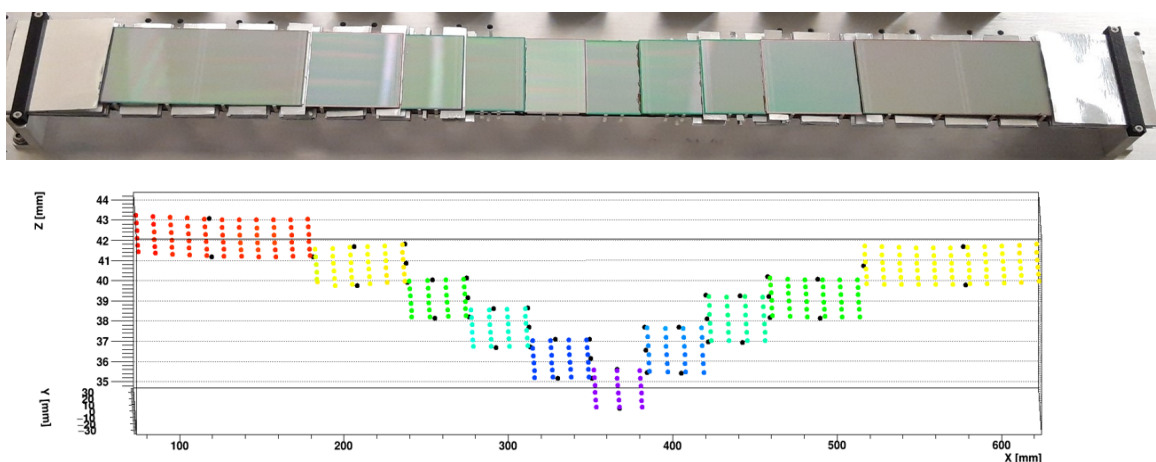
(Top) STS ladder assembled with 10 non-functional modules i.e., modules with sensors and micro-cables with the shielding without any FEBs, (Bottom) Optically inspected surface of sensors.
